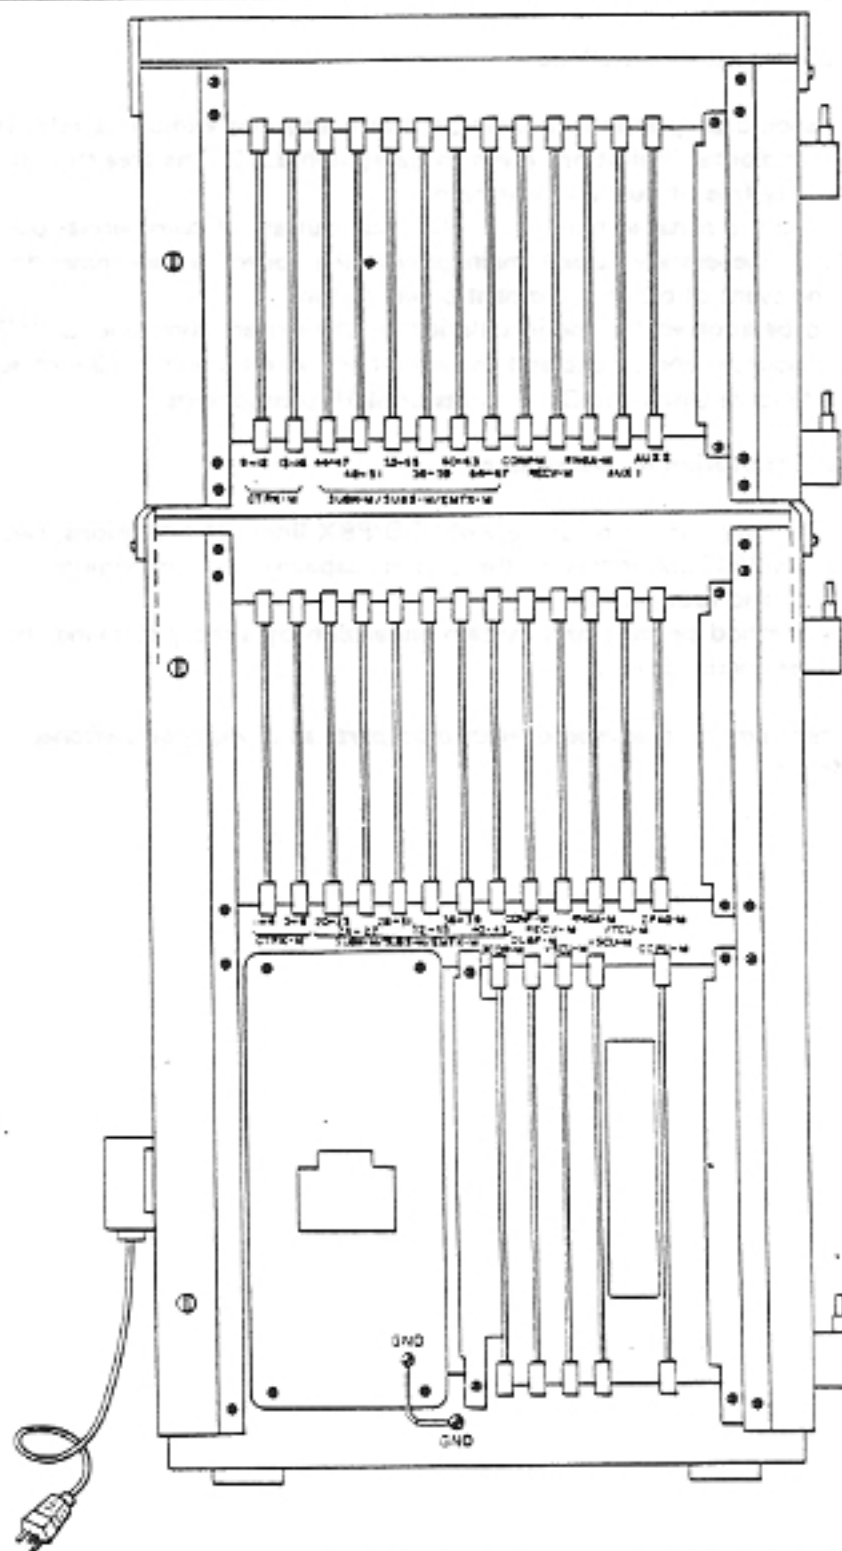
EX-824/1648CM Printed-Circuit Board Mounting
